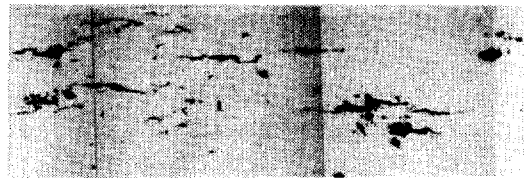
Macroscopic appearances of the fracture surfaces
